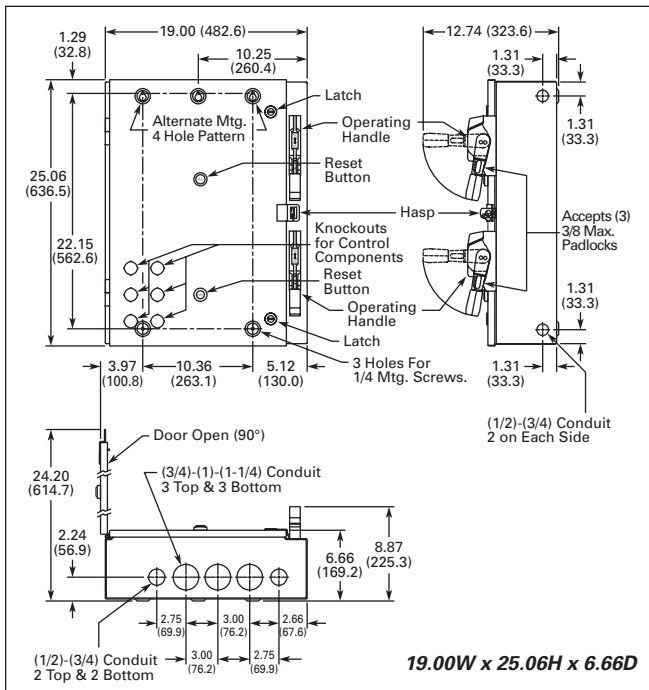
Box H, Type 1 — Approximate Dimensions in Inches (mm)
